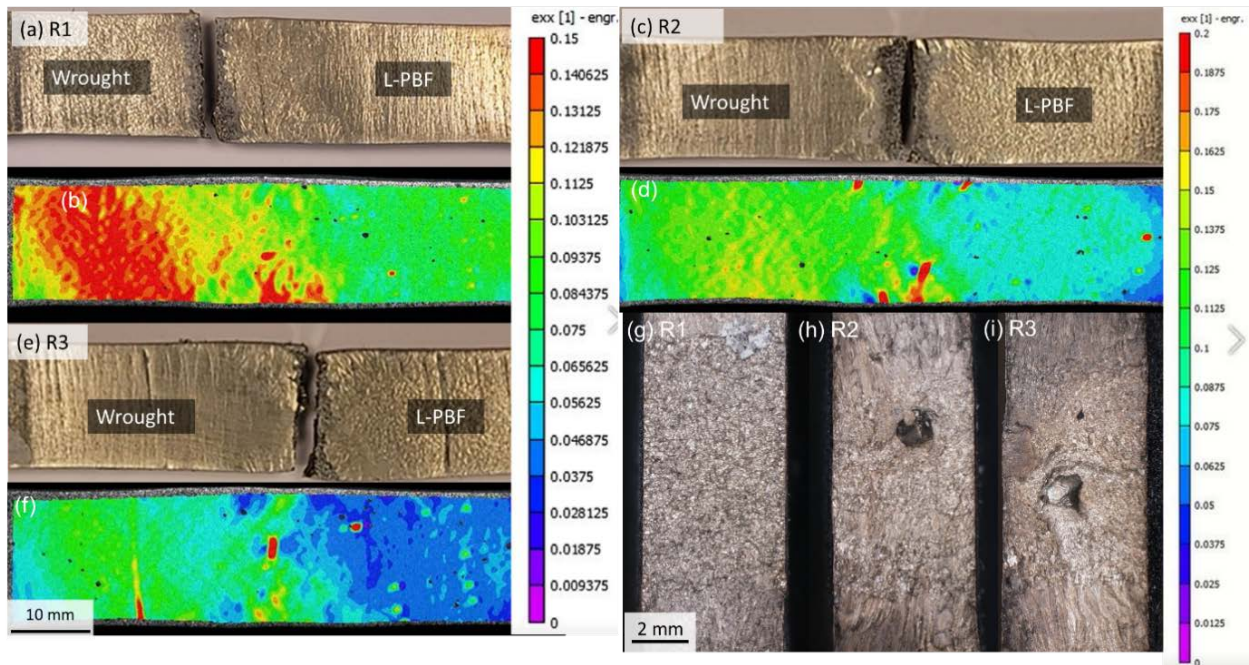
RT tensile test DIC results (a–b) R1 fracture location DIC engineering strain map, (c–d) R2 fracture location DIC engineering strain map, (e–f) R3 fracture location DIC engineering strain map, and (g–i) respective fracture surfaces
